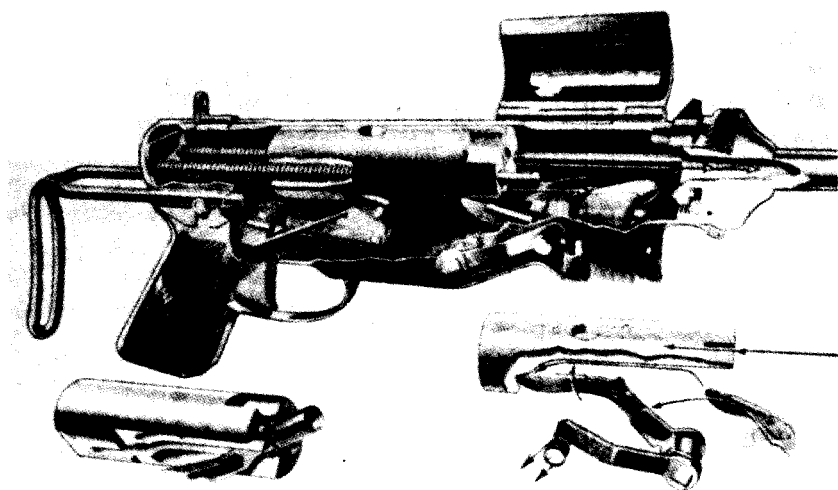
M3, cutaway view. Lower left shows camming action of ejector on empty cartridge case. Lower right shows action of retracting lever and handle in cocking the gun.
